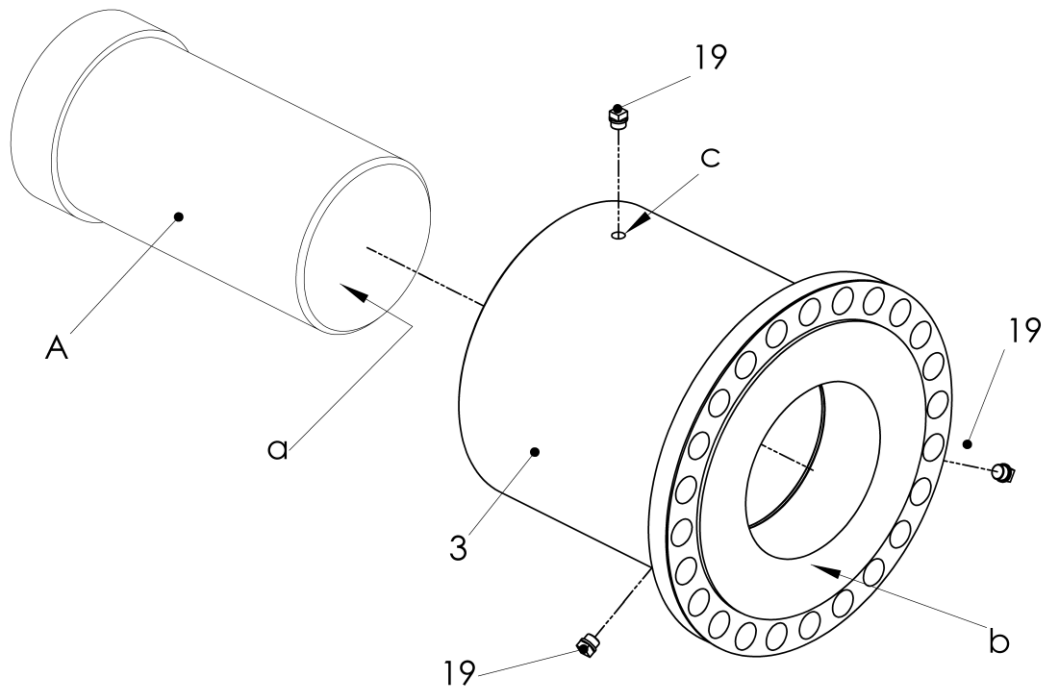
Mounting the hub with cylindrical oil interference fit
